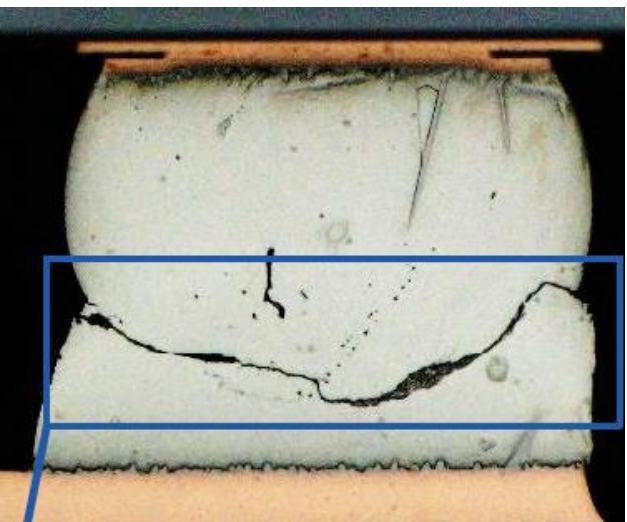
Leg 2 (FS mold + SAC405 ball) solder crack.
